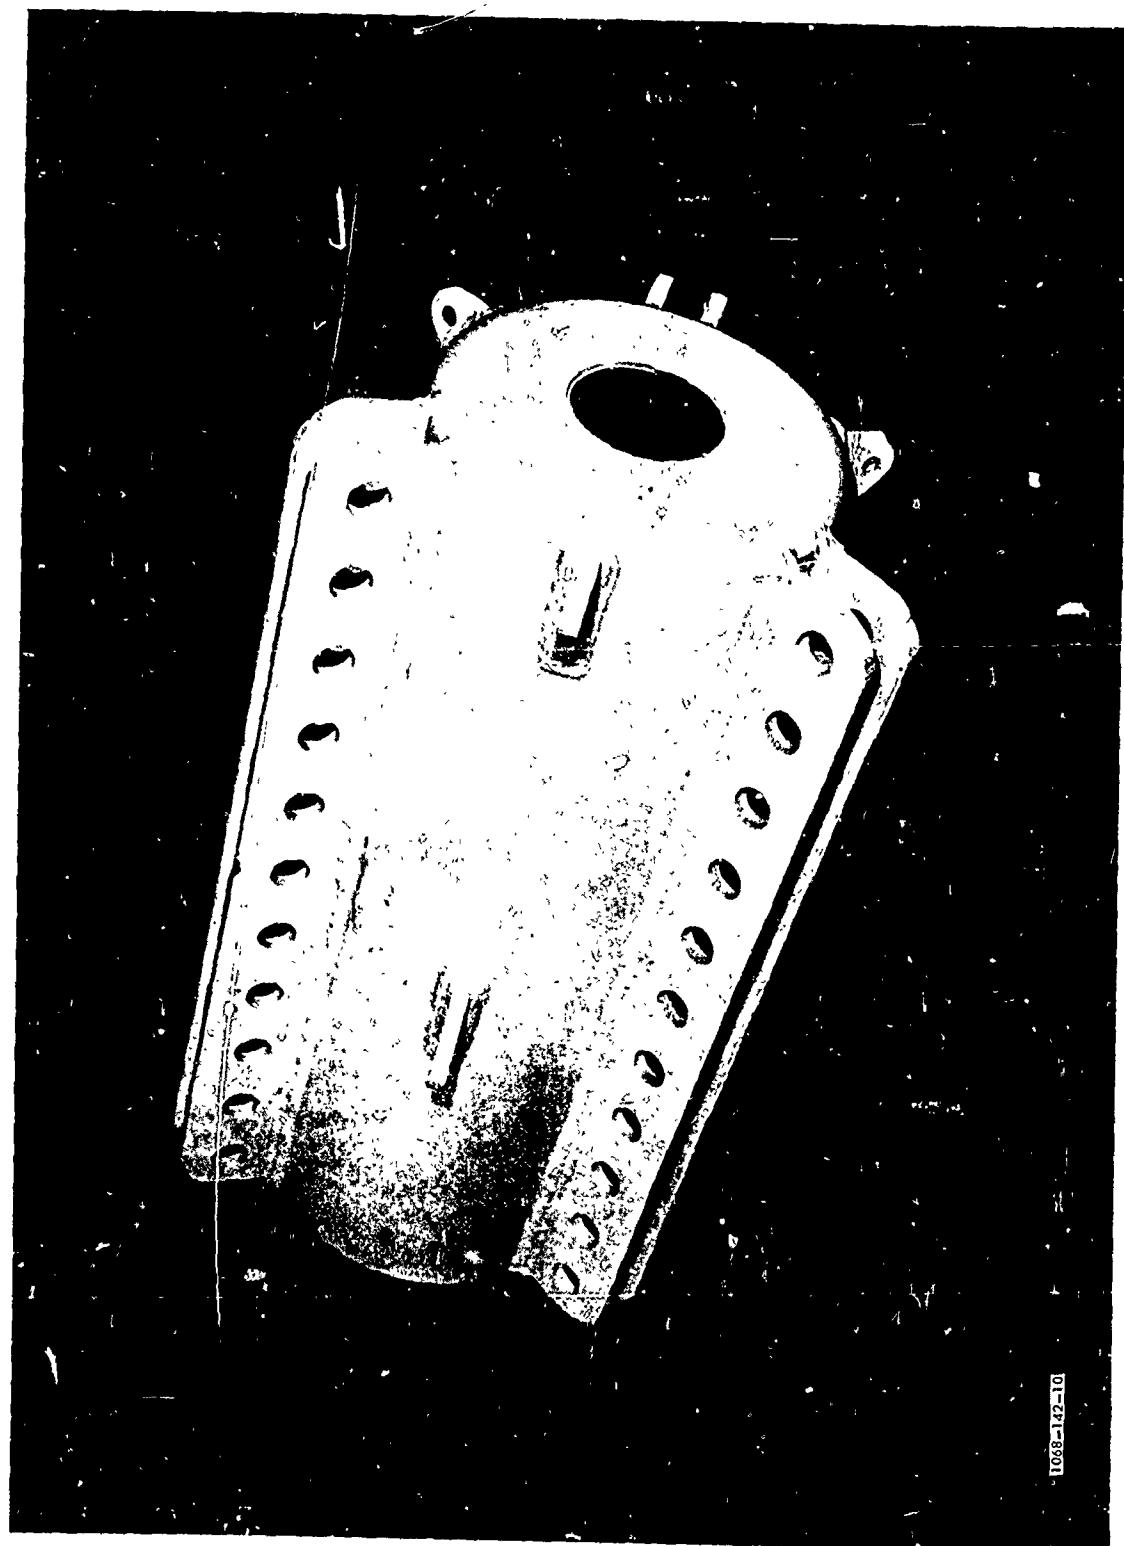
Barrel Assembly. (Sheet 2 of 2)
